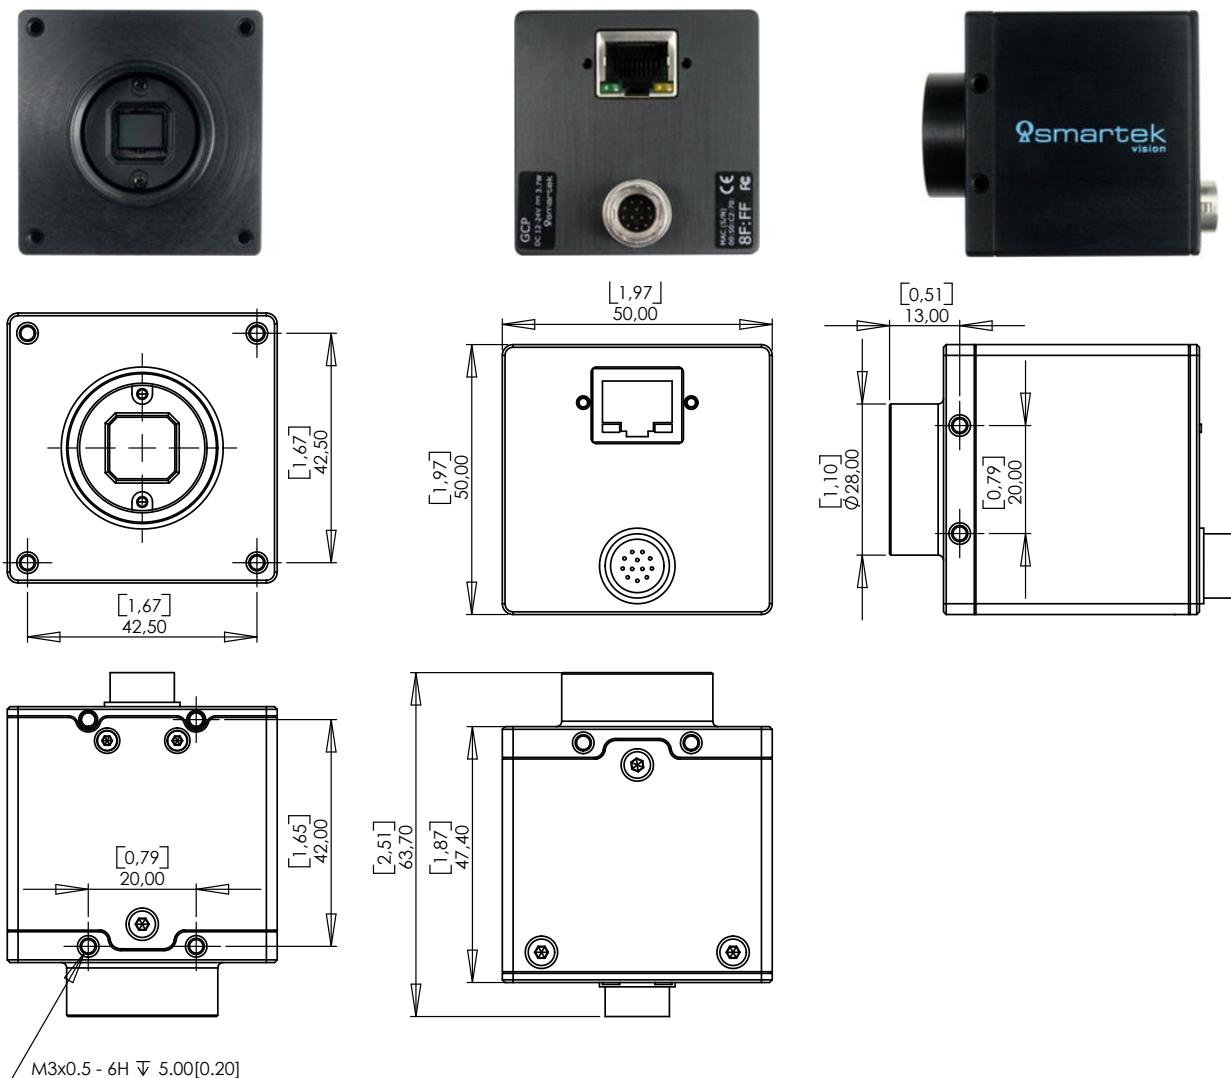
Technical measures of GCP camera with standard housing (all dimensions are in mm [inch])
